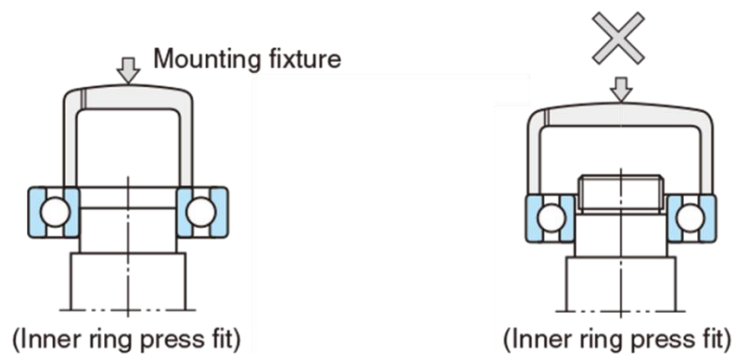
When mounting the inner ring with tight fitting, apply pressure to the inner ring only as rolling elements are easily damaged. Image taken from [108]
